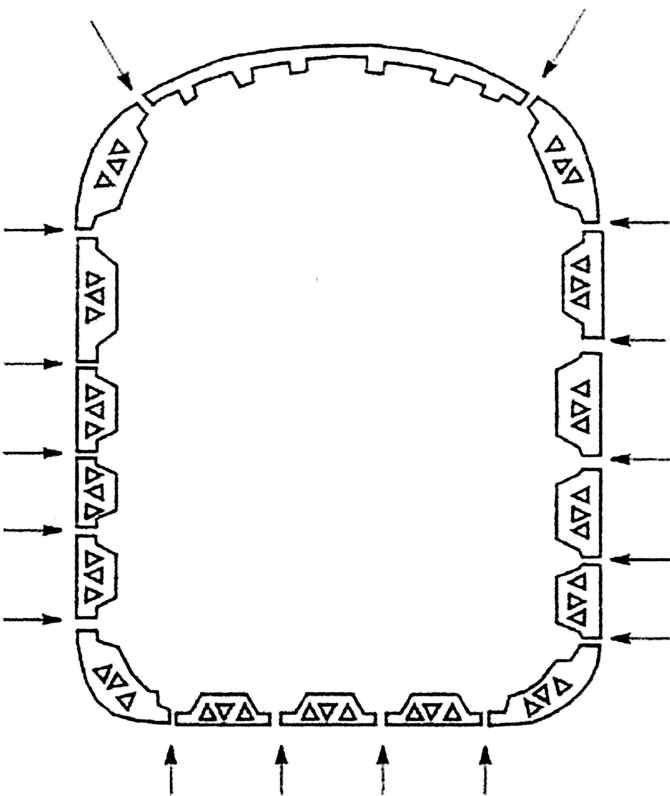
The design of the welded body of the passenger train car (arrows show places of longitudinal welding)
